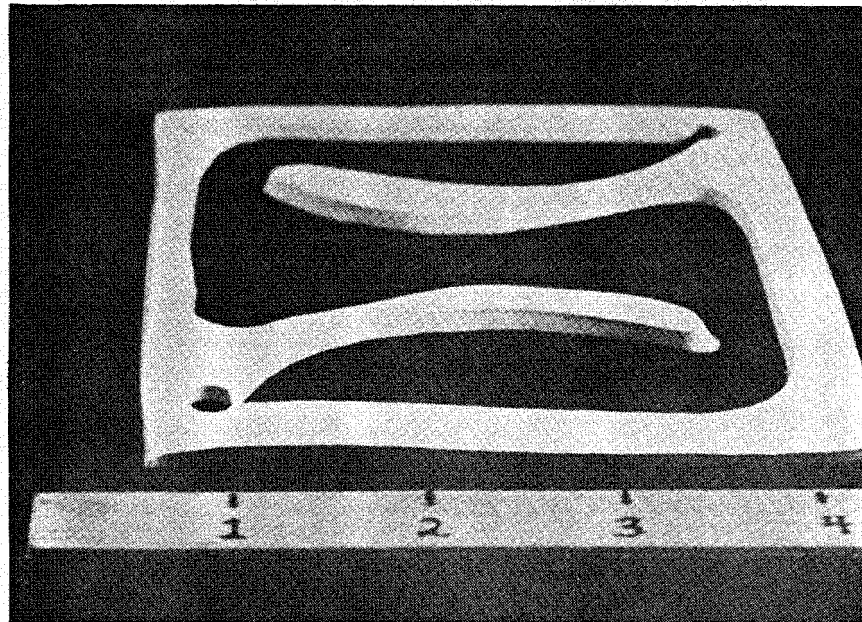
ALUMINA SEPARATOR PLATE.
